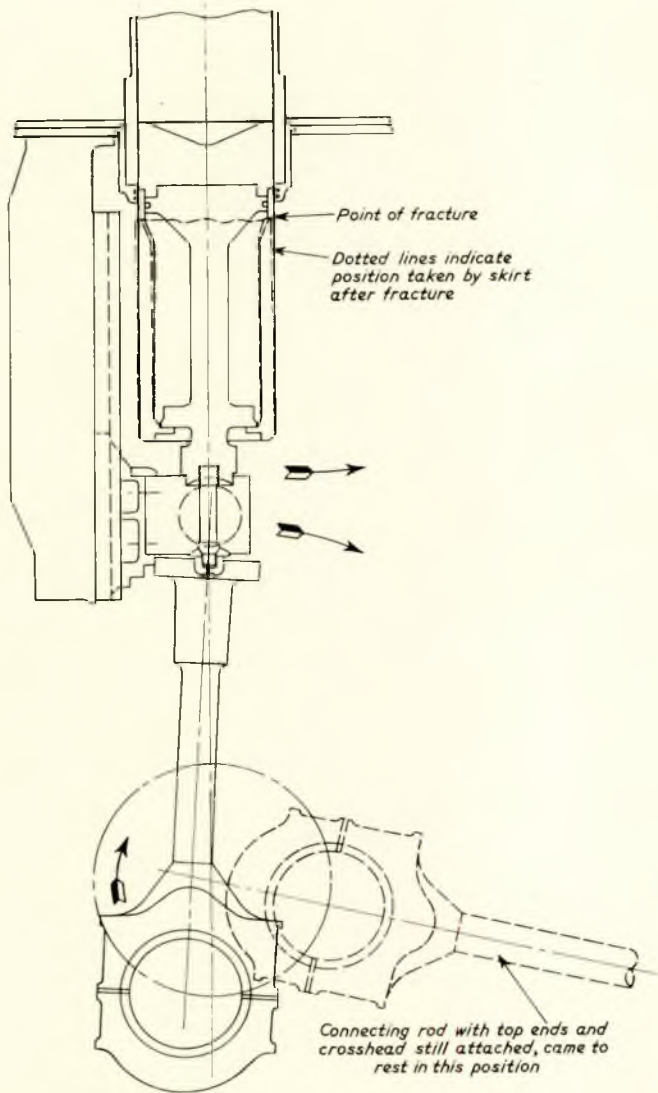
Sketch illustrating sequence of events after piston skirt had fractured
